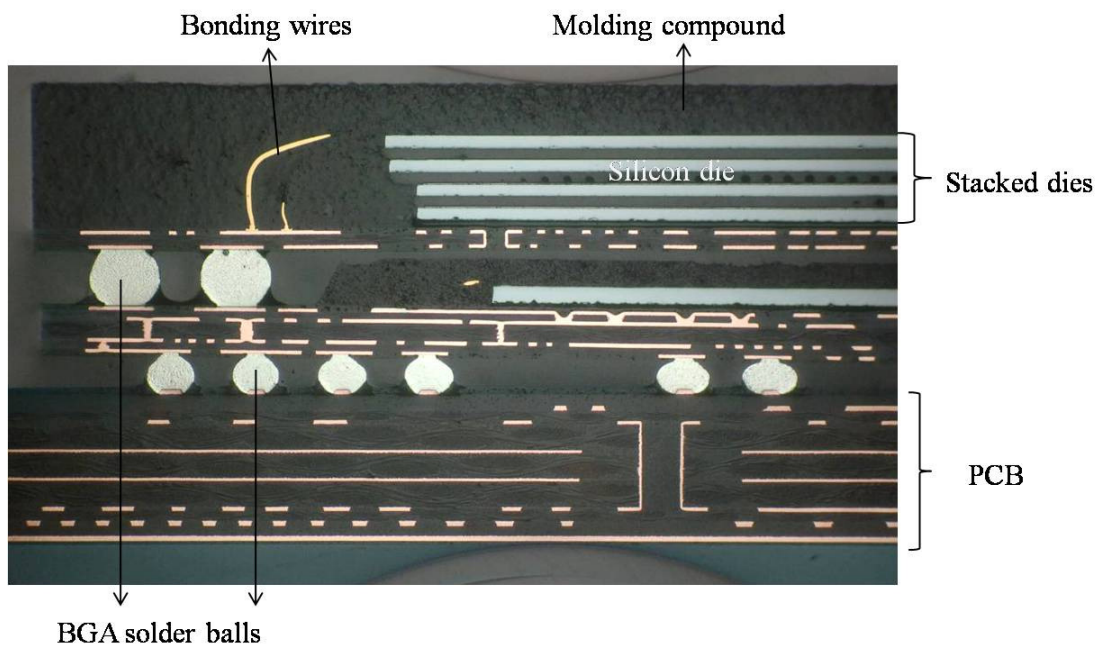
A cross section of a stacked BGA package [Prismark, 2008]
